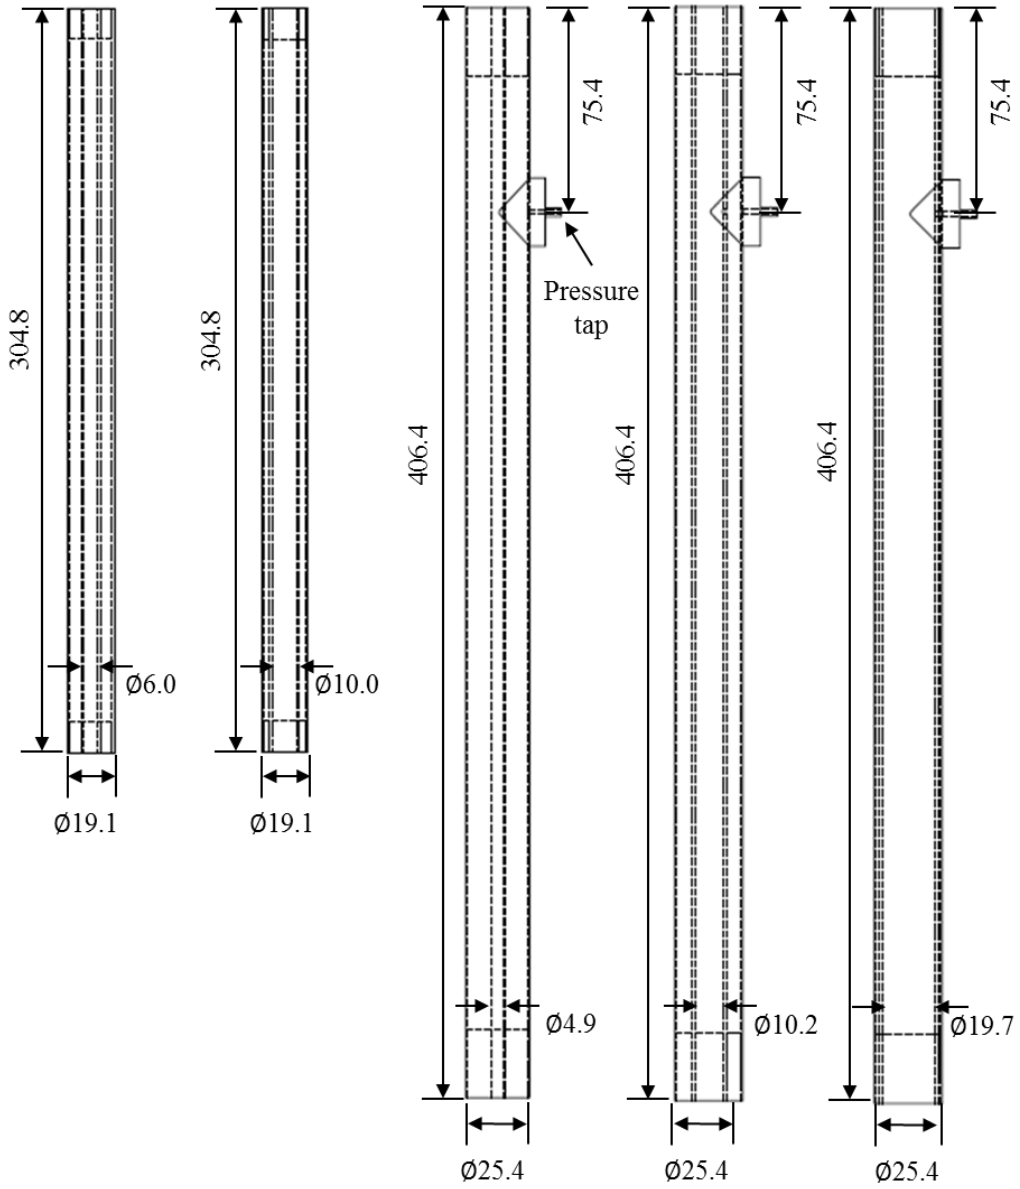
Dimensions of venturi tube. All dimensions are in millimeters.
